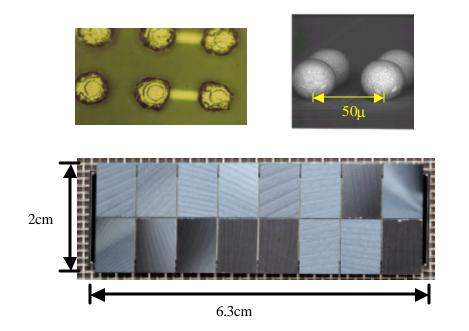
Indium bumps (top left), Solder bumps (top right) and back side of bare module.
